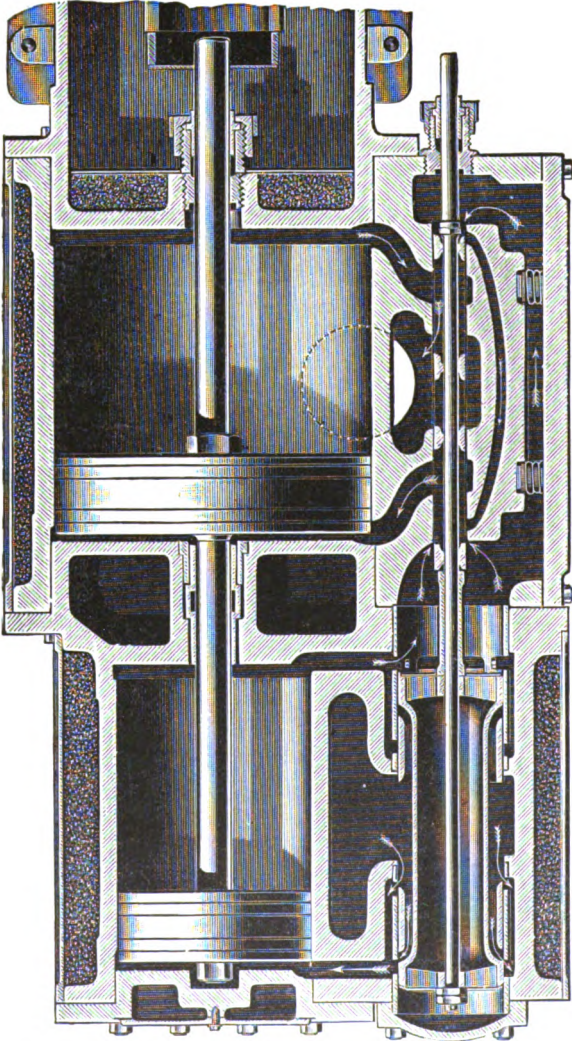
Section through Cylinders and Valve-chests of the Ideal Compound Engine, showing Piston-valve.
